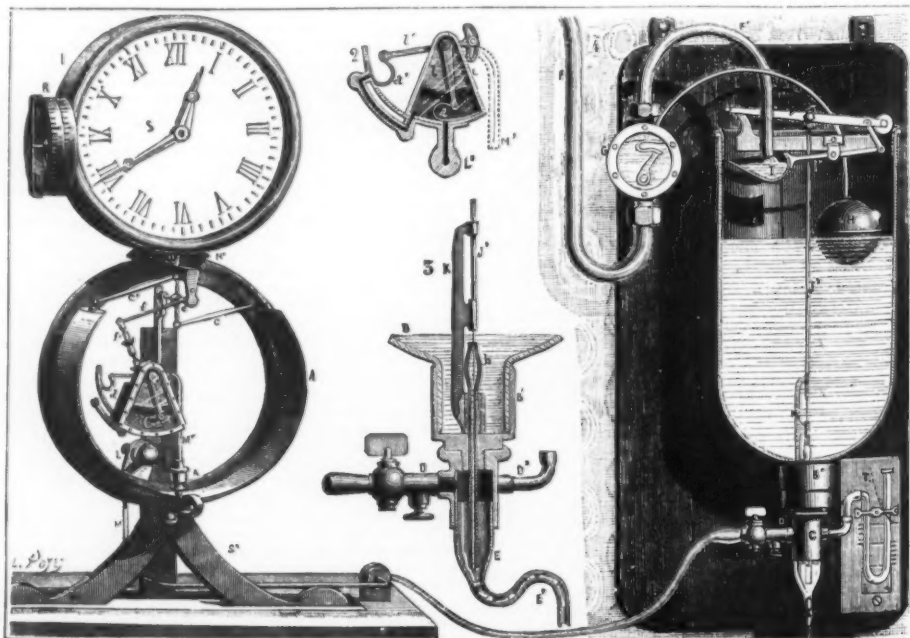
PNEUMATIC CLOCK.—DETAILS OF MECHANISM.
